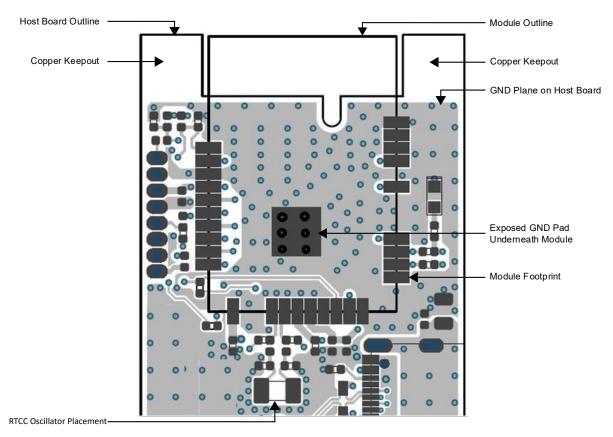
Example of RNWF02 Module Placement on Host Board (Top Layer)
